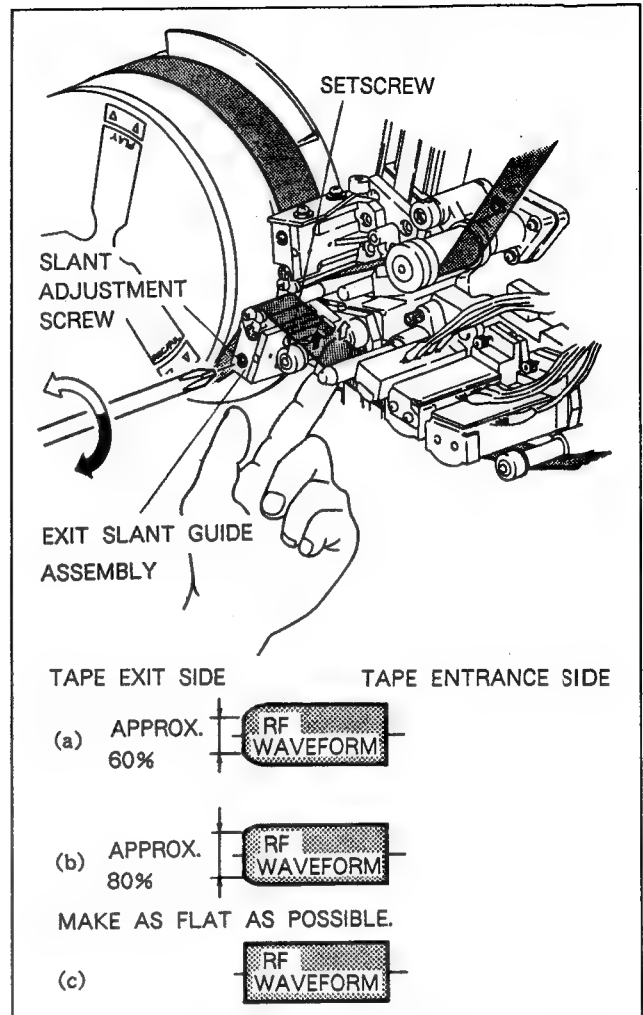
Taper Guide Height and Exit Slant Guide Slanting Adjustment
